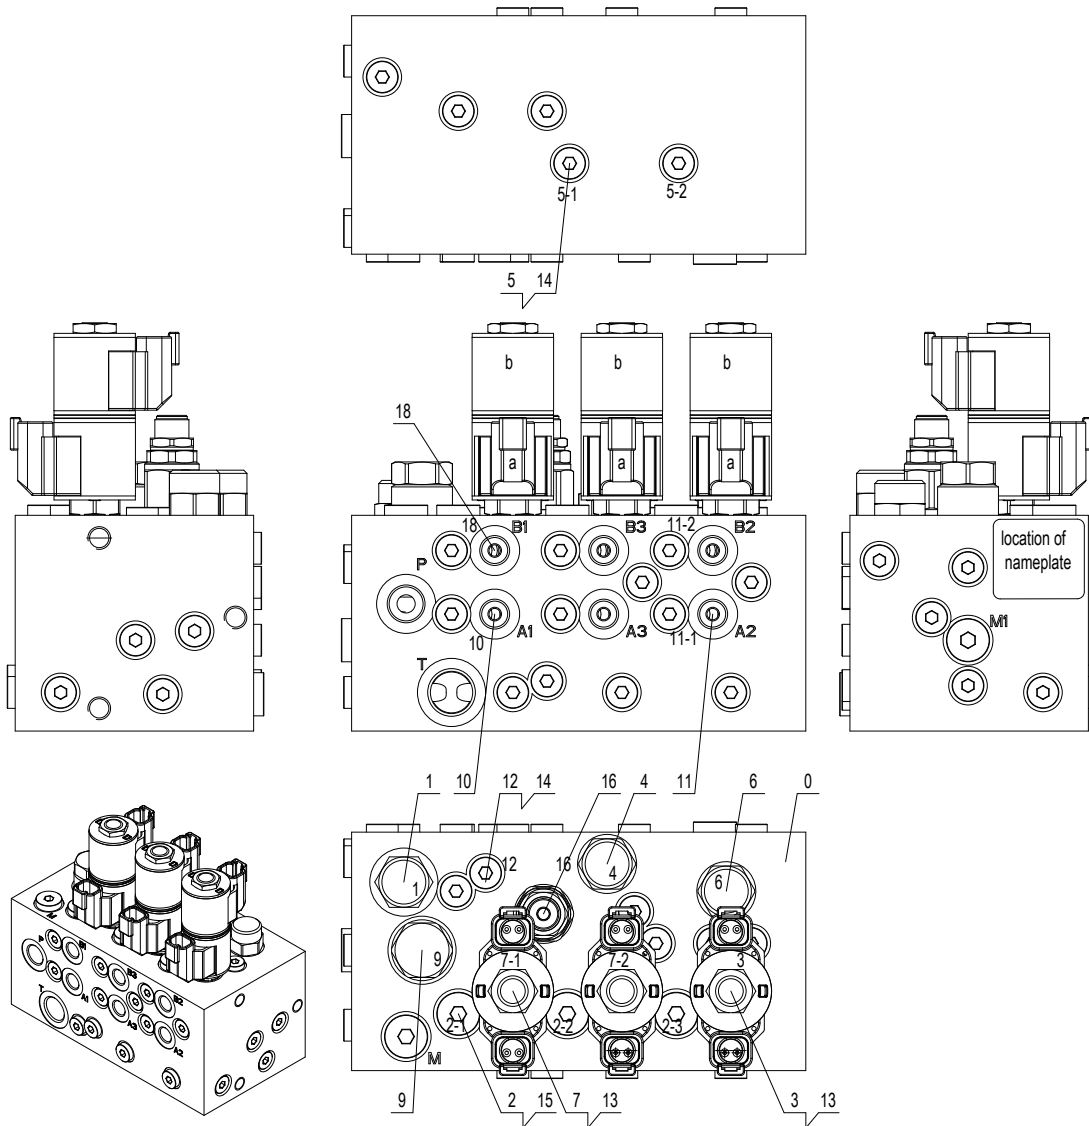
Platform Control Valve Manifold (PN.202040003806)
